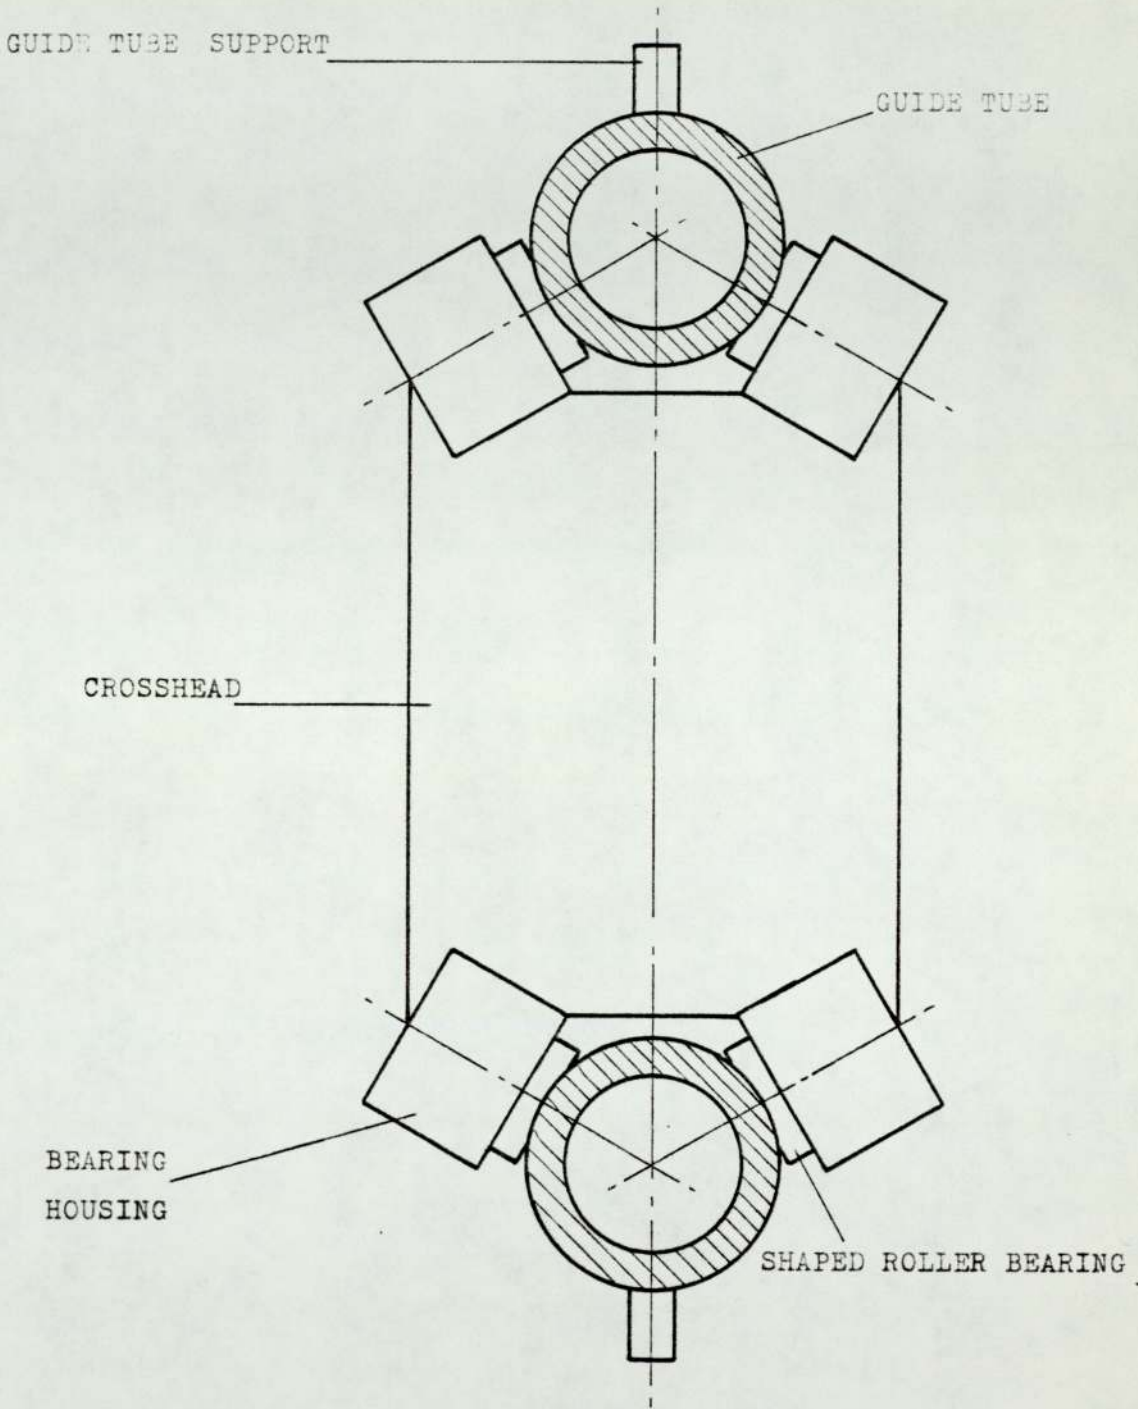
POSSIBLE CONFIGURATION OF A GUIDANCE SYSTEM USING SHAPED ROLLER BEARINGS.
